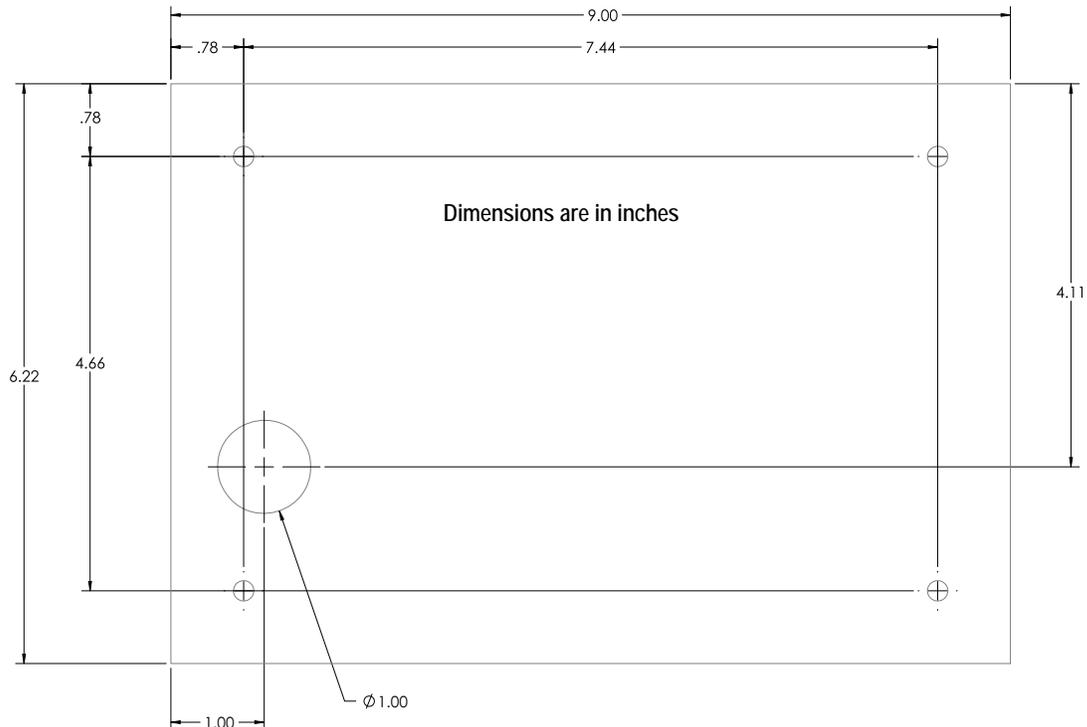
7 Inch Touch Only Panel Mount Dimensions
